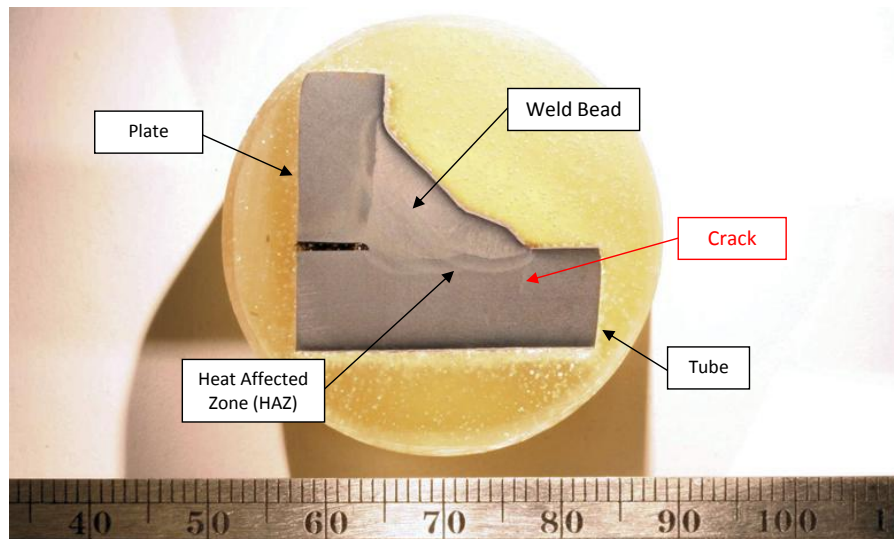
Macroscopic photograph of cross-section from S-61-0002 displaying the weld bead, HAZ and crack.
